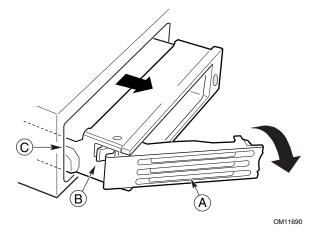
Removing a Carrier and Hard Drive from a Drive Bay
